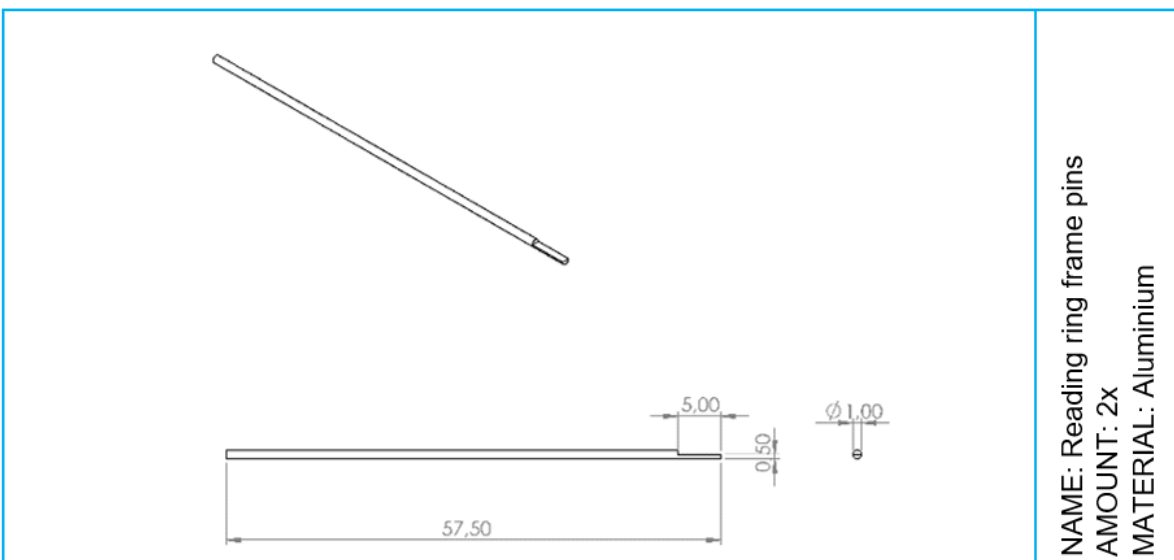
Construction drawings of the reading ring frame pin - Machined prototype
